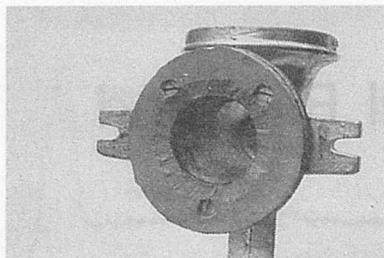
Stationary gum rubber disk with beveled inner edge, mounted on to hand mill.
